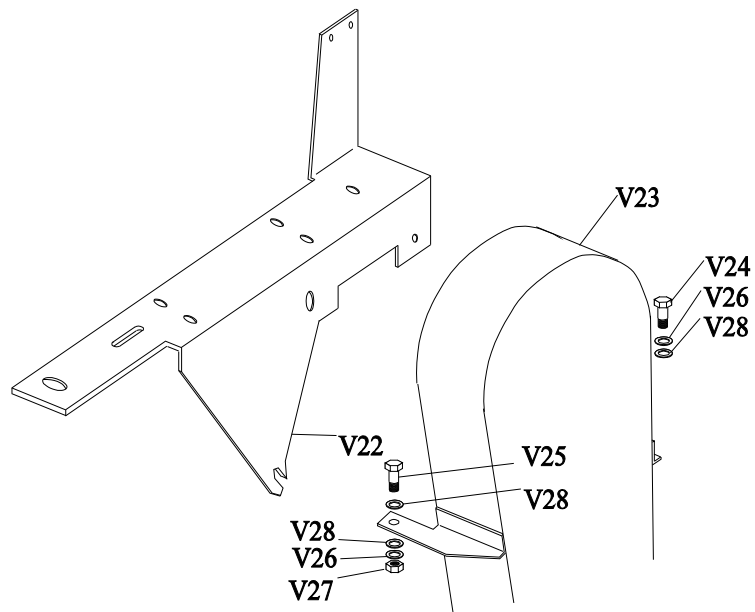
Vacuum Pump Bracket & Guard on Earlier Models
